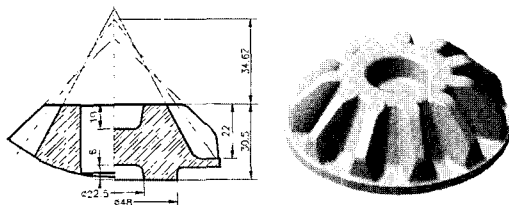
Schematic of automobile differential gear unit for rear axle driven truck and bus machined (left) and forged (right) drawing for the warm forged bevel gear
